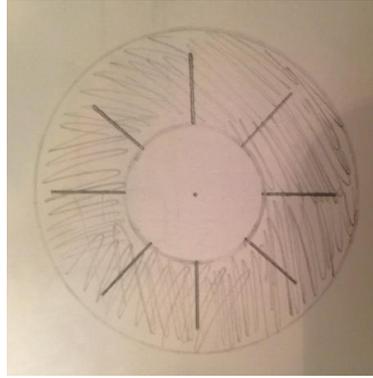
Top view of the rubber gasket as the chosen puck holder [16].
